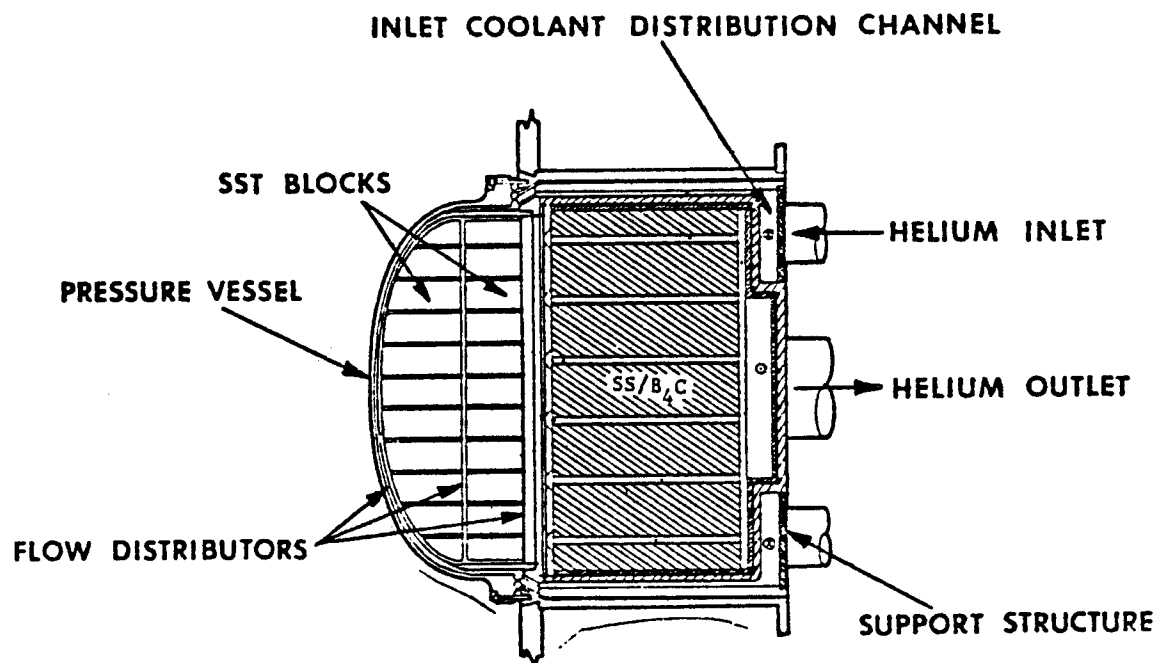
Cylindrical blanket module with ellipsoidal end closure [17].
